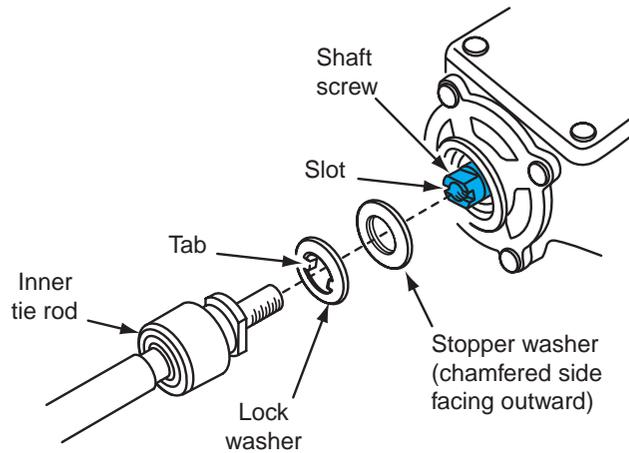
Installing the inner tie-rod end on the shaft screw.
